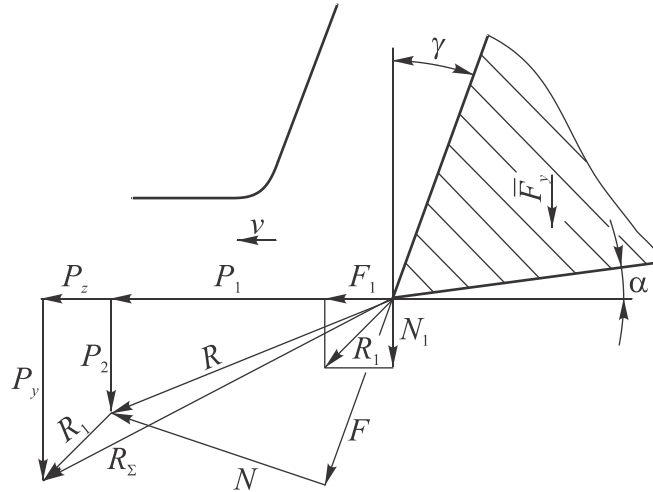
Forces acting on the rake and flank surfaces of a tool
